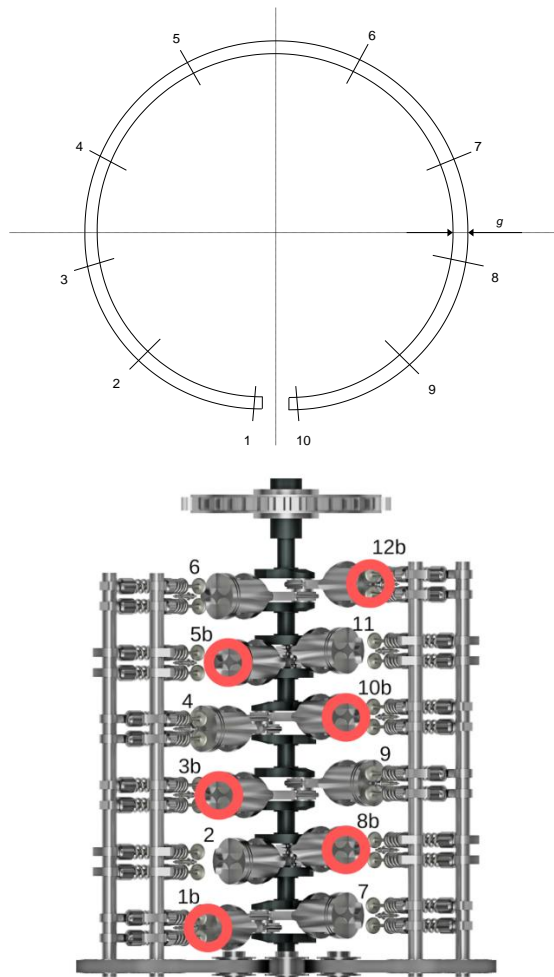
The measurement scheme of axial high, radial thickness, and the ring number of the EMD 645 engine
